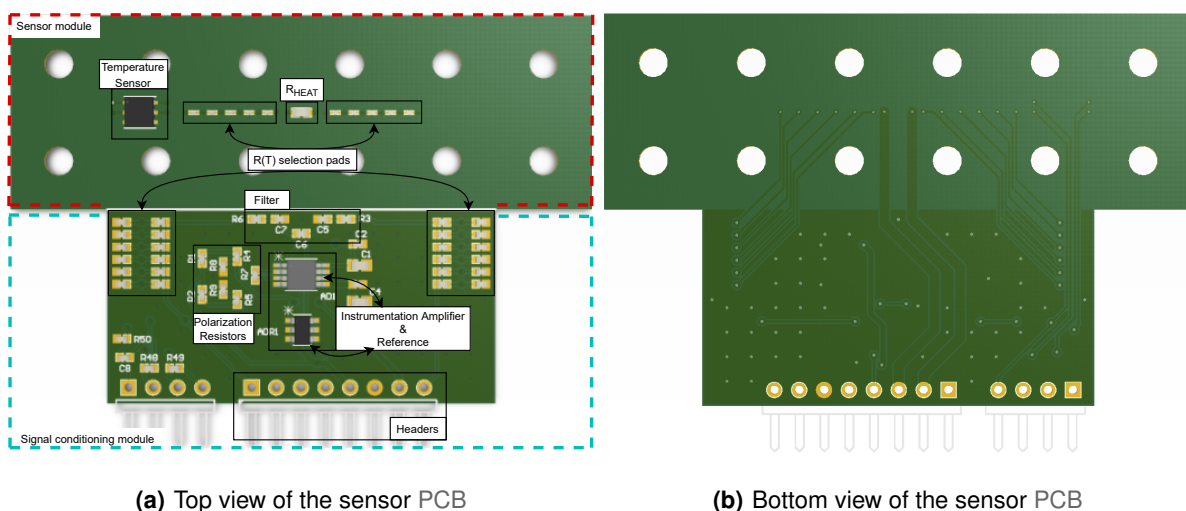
Altium Designer's 3D view of the Sensor's PCB.
